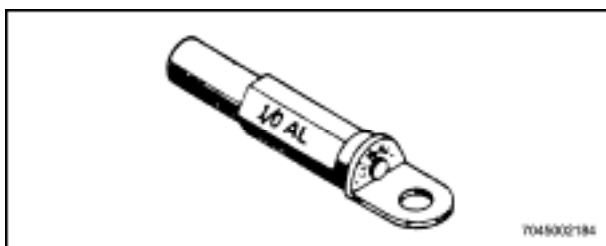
Single Crimp on Aluminium Terminal Lugs
